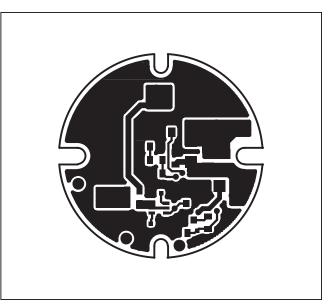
MAX16840 EV Kit PCB Layout—Solder Side
